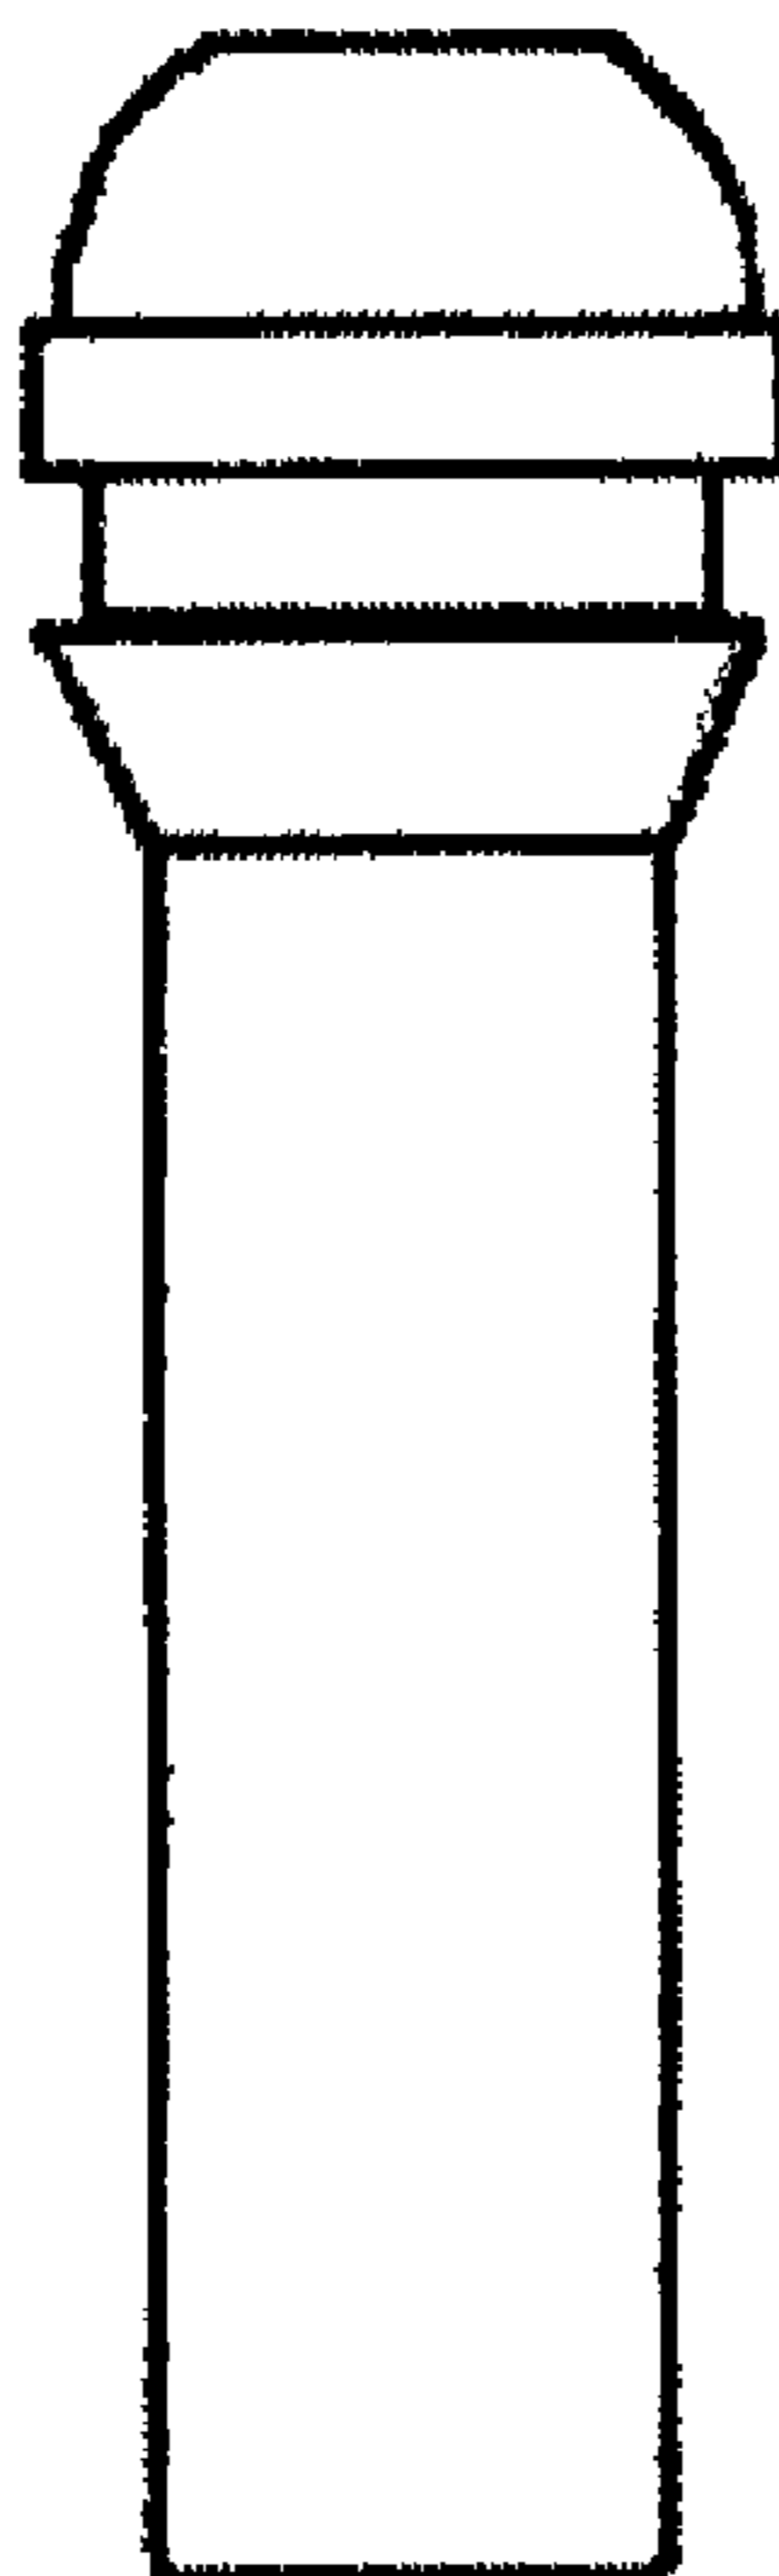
is a bottom perspective view of the secure bushing and connector for universal medical gas delivery.
